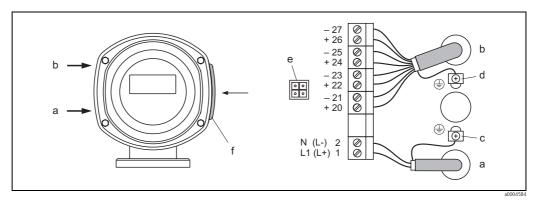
Connecting the transmitter (stainless steel field housing); cable cross-section: max. 2.5 mm²
